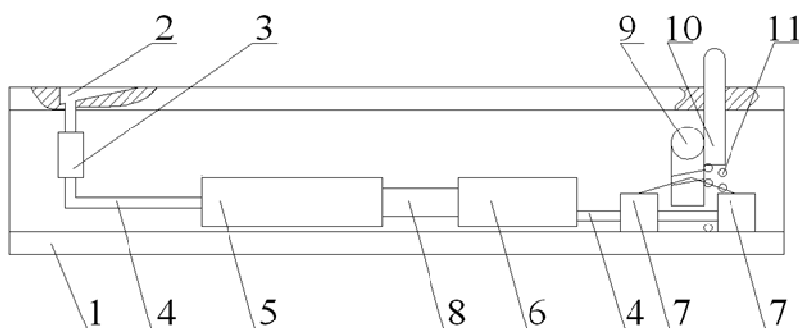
Lubrication system of guides to move heavy cargo: 1 – consisting of a guide; 2 – pockets; 3 – throttles; 4 – oil-lines; 5 – tank for lubricant cartridge; 6 – secondary hydraulic cylinder; 7 – primary hydraulic cylinders; 8 – piston-rod; 9 – system converting the translational movement into the rotary; 10 – toothed rack; 11 – return spring
